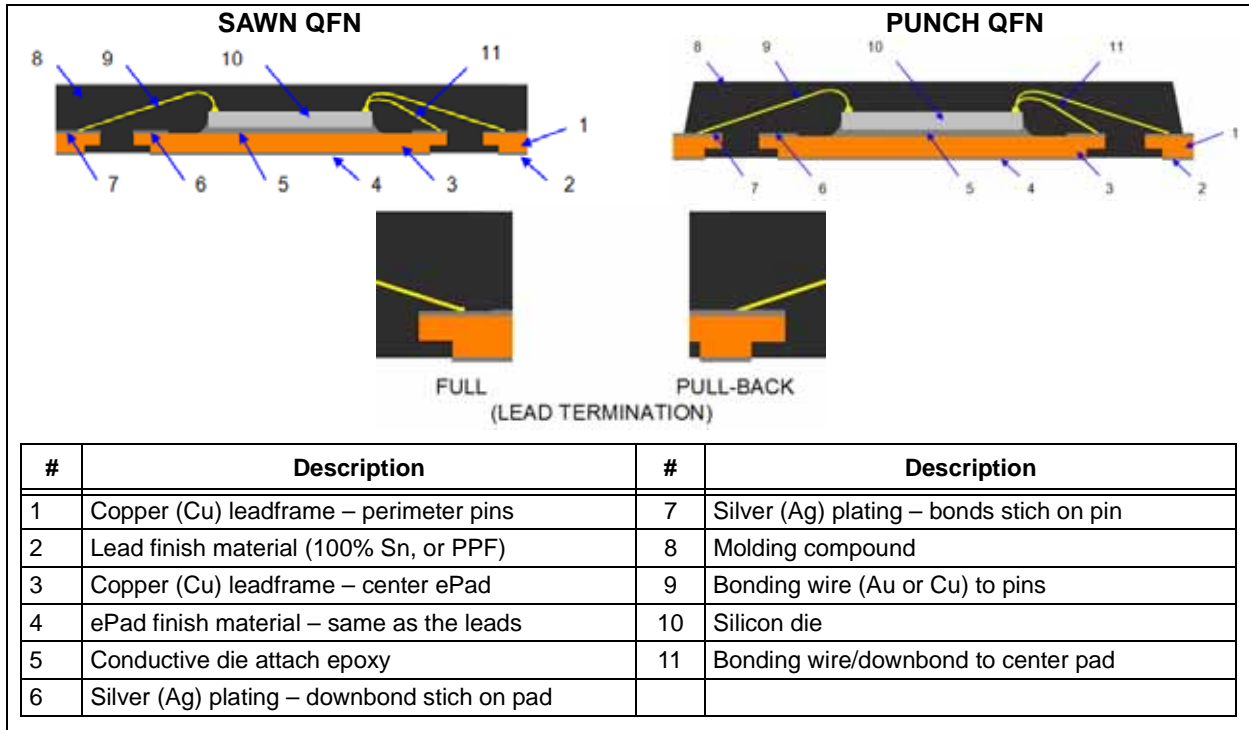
QFN-COL PACKAGE CONSTRUCTION
